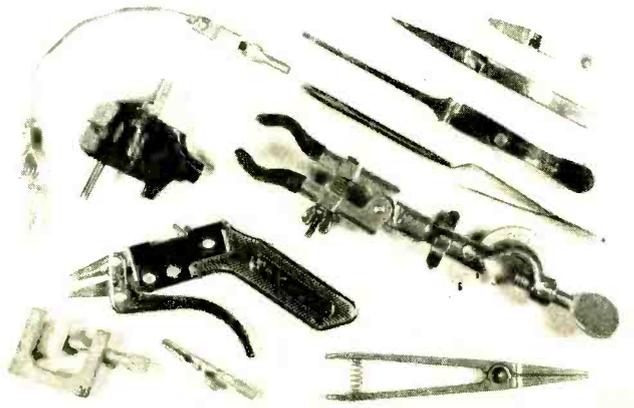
HOLDING DEVICES firmly grasp just about any type of part or tool.
